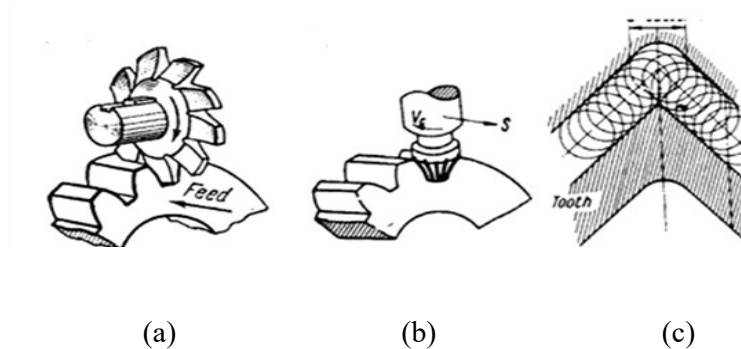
Producing teeth by (a) disc type end mill (b) single helix (c) double helix [6]
